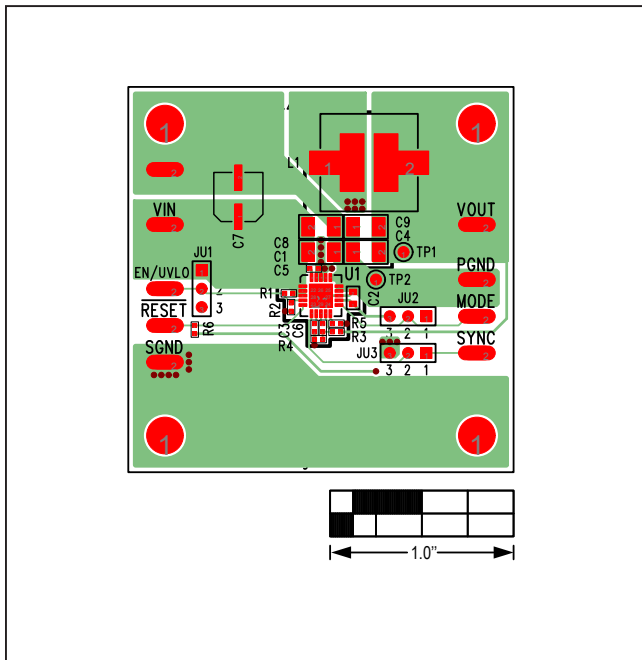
MAX17544 5V Output EV Kit Component Side PCB layout
